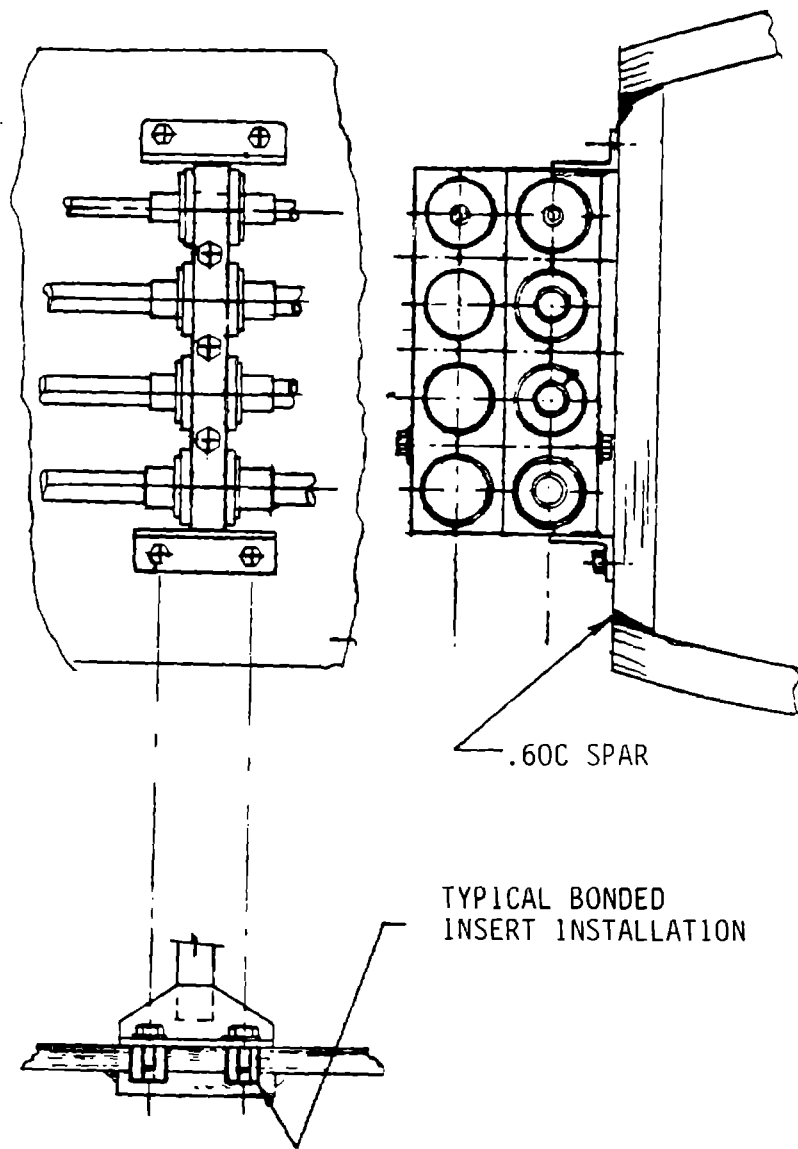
Hydraulic and Electrical Conduit Mounting Provisions
